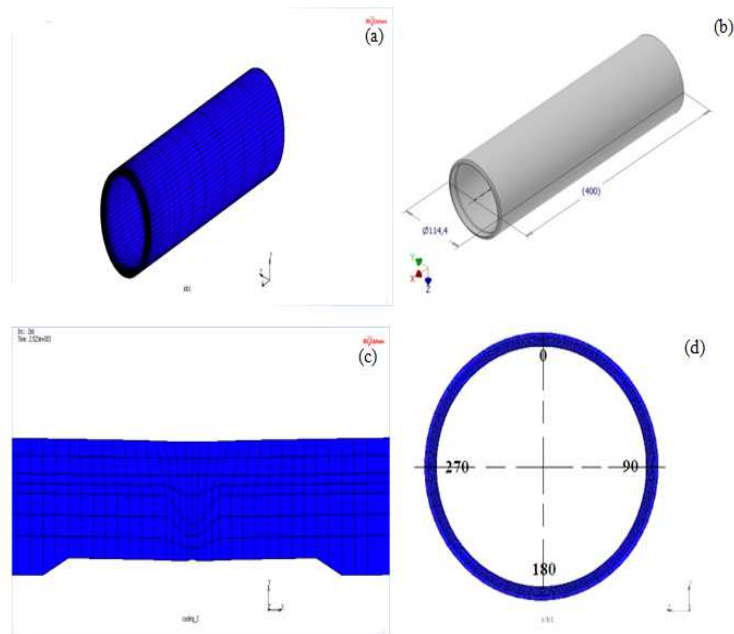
(a) 3-D Finite Element Model of Pipe (b) Dimensions of Pipe (c) 2-D Finite Element Model (d) Welding Direction
